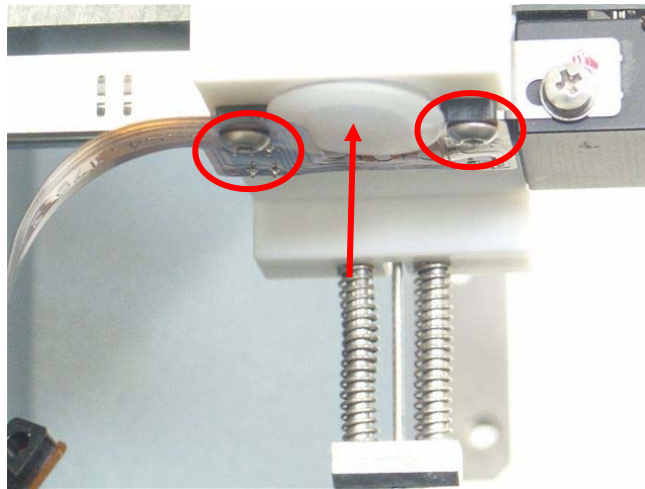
Optical home sensor mounted on the needle arm unit top plate.
